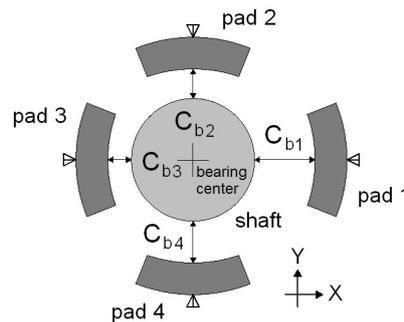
TPJB in load-on-pad configuration: asymmetric geometry due to variation of bearing assembled clearances in each pad (Silva and Nicoletti, 2019).
